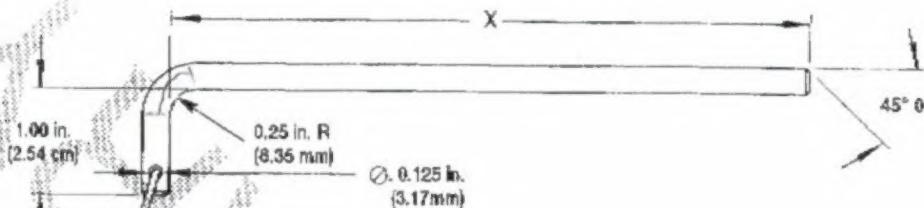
T306 Input/Lube Pump Drive T-Bolt Assembly - Field Fabricated
